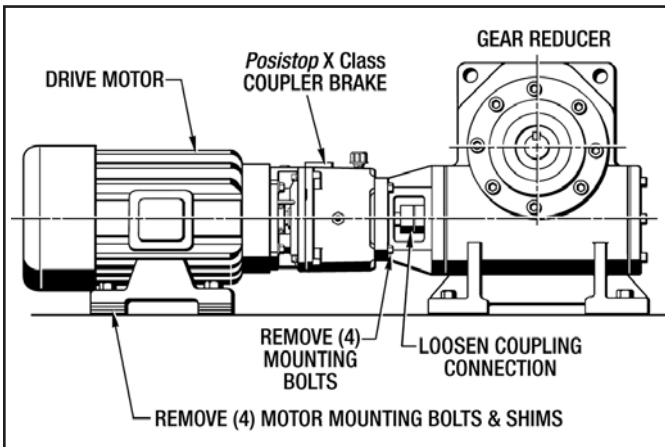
Removing Coupler Brake From Gear Reducer
